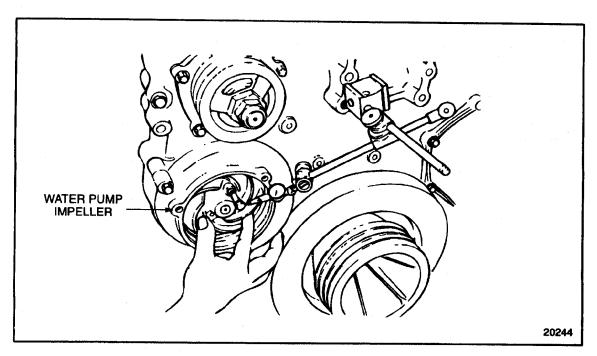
Water Pump Drive Gear-to-Bull Gear Lash Measurement
